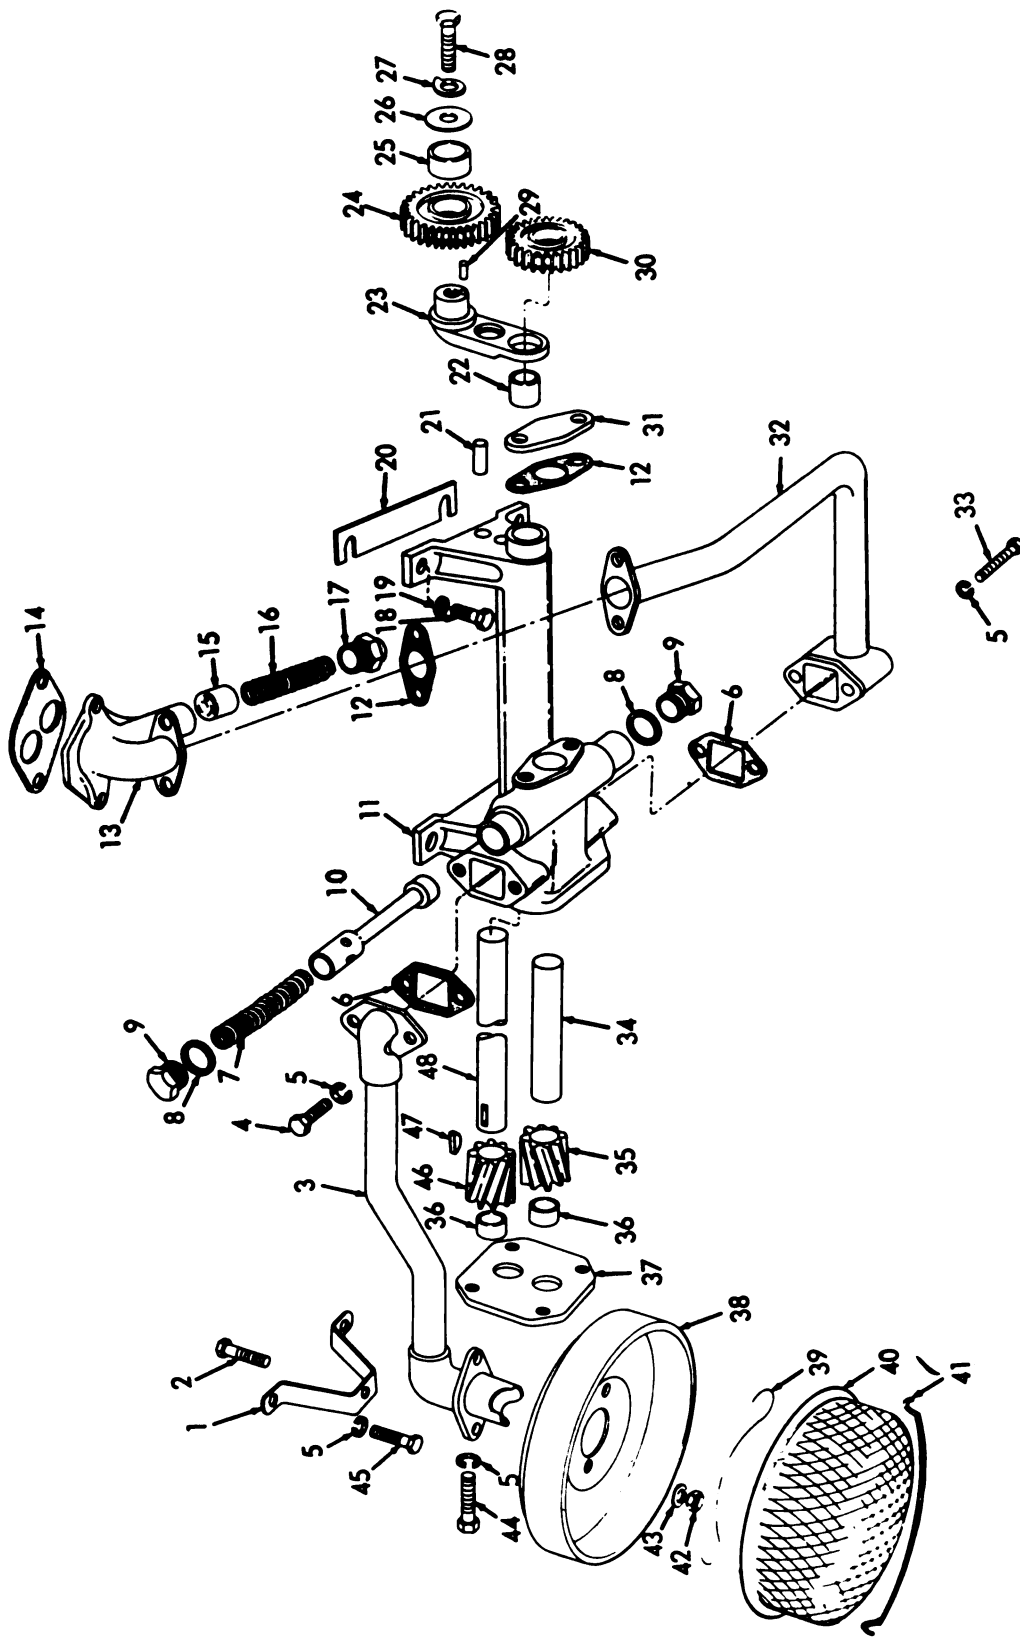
Engine oil pump and oil pressure regulator, disassembly and reassembly.
